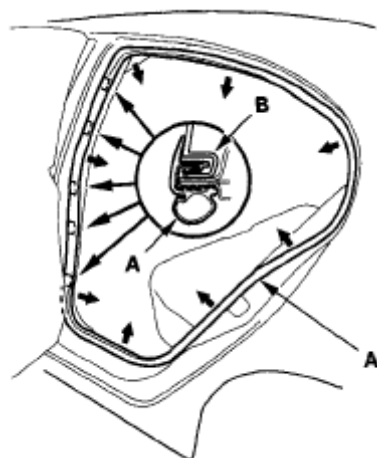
Pulling Out Rear Door Opening Seal From Trim Hook
